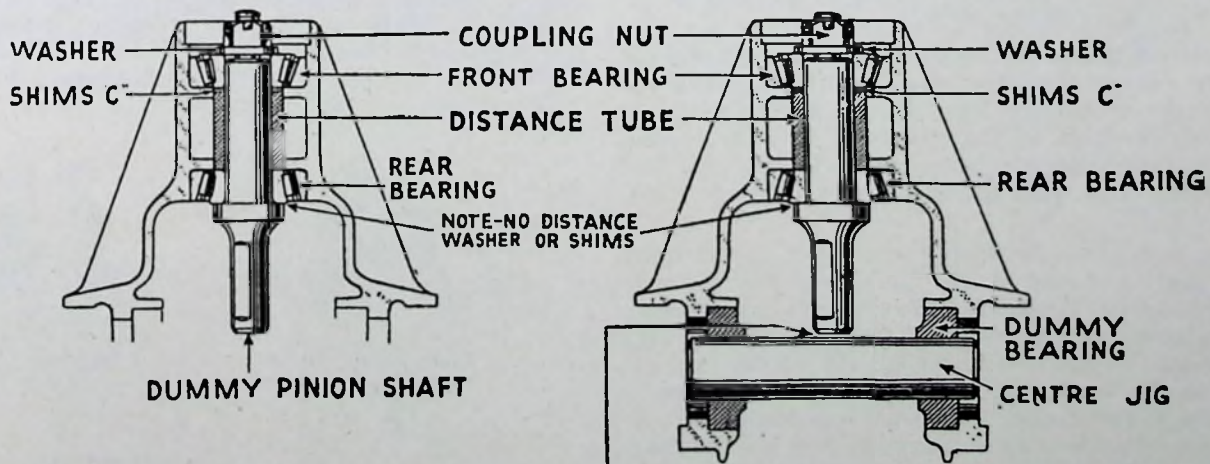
Jigs used in adjusting the bevel pinion bearing pre-load and bevel pinion in relation to the axis of the crownwheel
